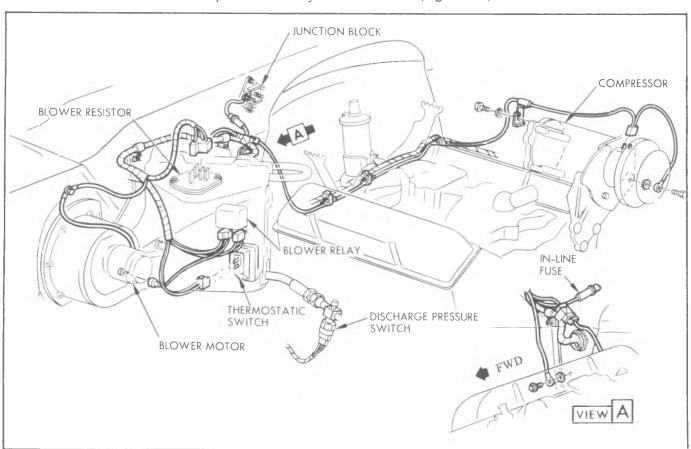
B-45--Engine Compartment Wiring Harness (C-K Models)
